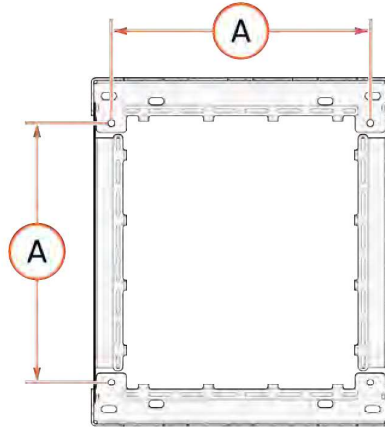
Liquid Cooled Satellite footprint and fixing points (mm)
